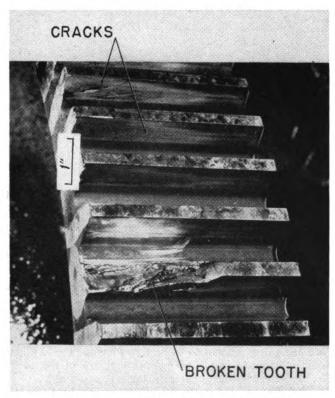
Fatigue cracks and ultimate breakage of gear teeth
